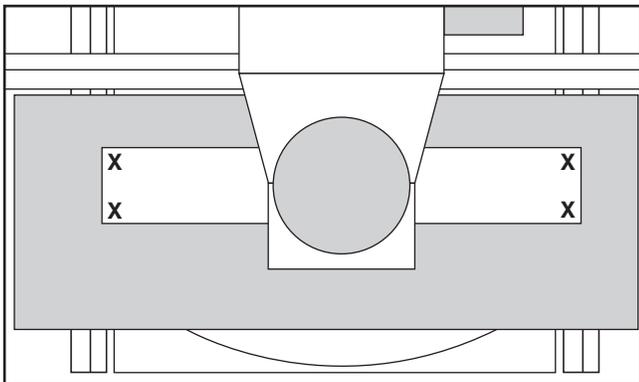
Measurement points (X's) for table and boring head parallelism (top view).
